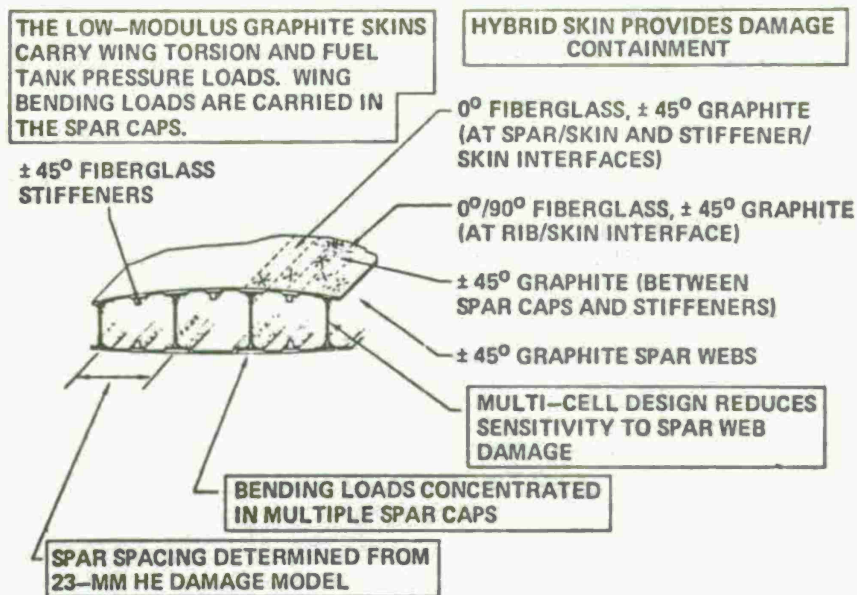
Design concept to provide improved damage tolerance using low modulus skin design.
